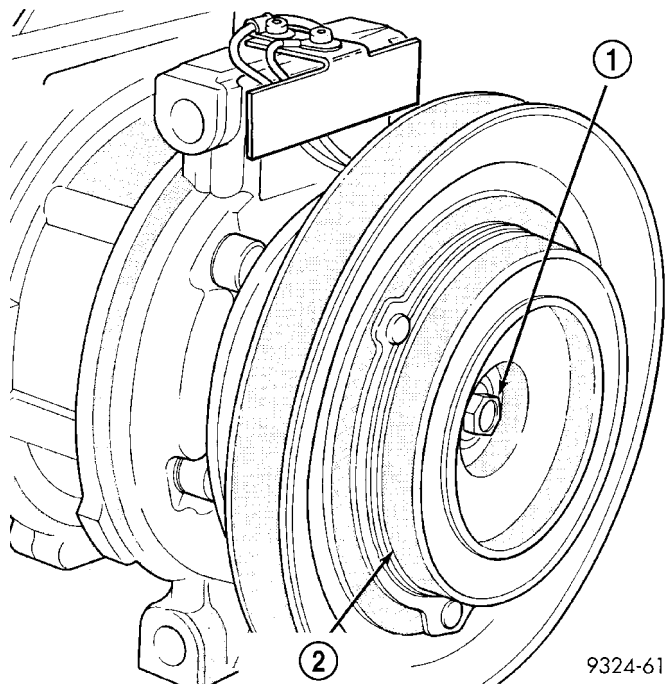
COMPRESSOR SHAFT BOLT AND CLUTCH PLATE
